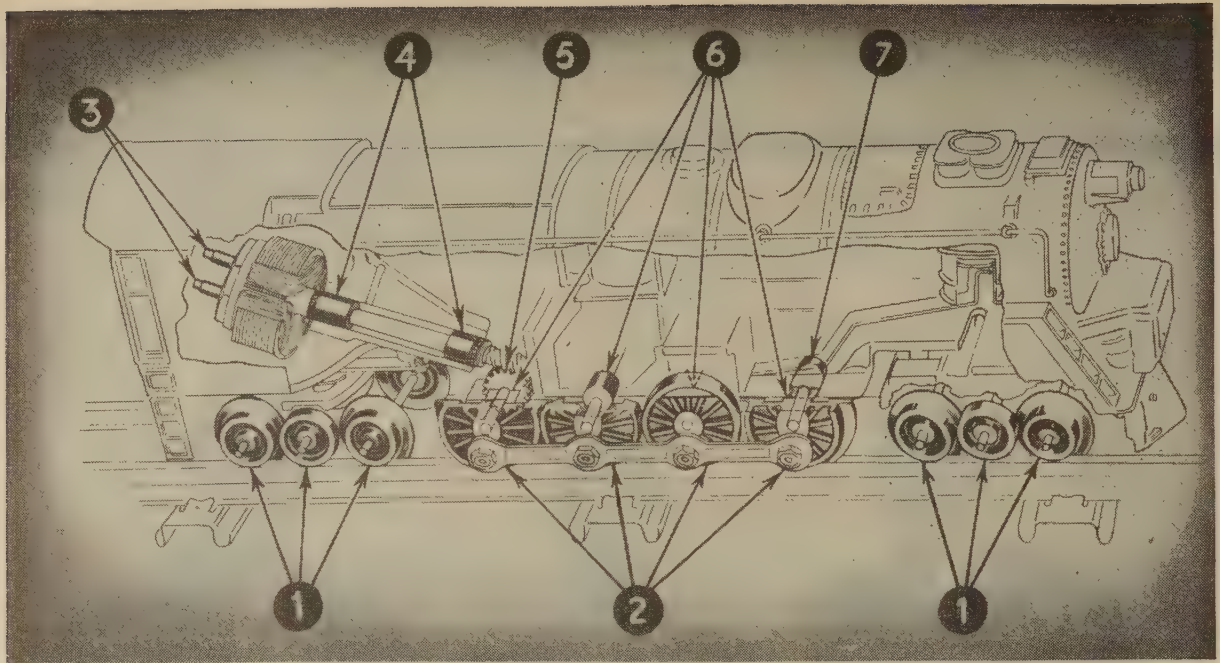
The Lionel toy locomotive contains 34 parts made by powder metallurgy. Components shown on the sketch are as follows: (1) car wheels, (2) drive wheels, (3) brushes, (4) bushings, (5) helical gear, (6) bushings, and (7) cam.
